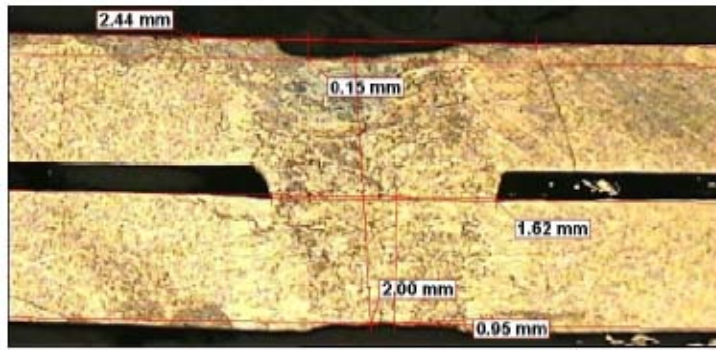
Microsection: remote laser weld in an overlap joint: 1.0mm to 1.0mm DX54.
